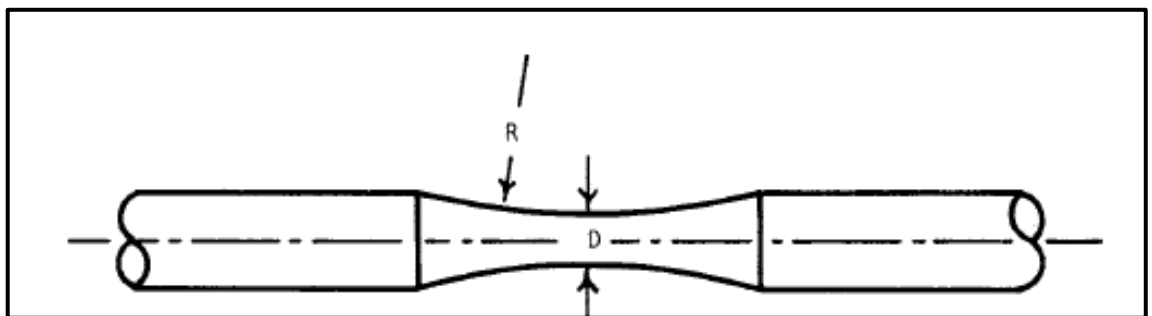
Specimen with a Continuous Radius between Ends, Figure Reproduced from ASTM E466 (2007)
